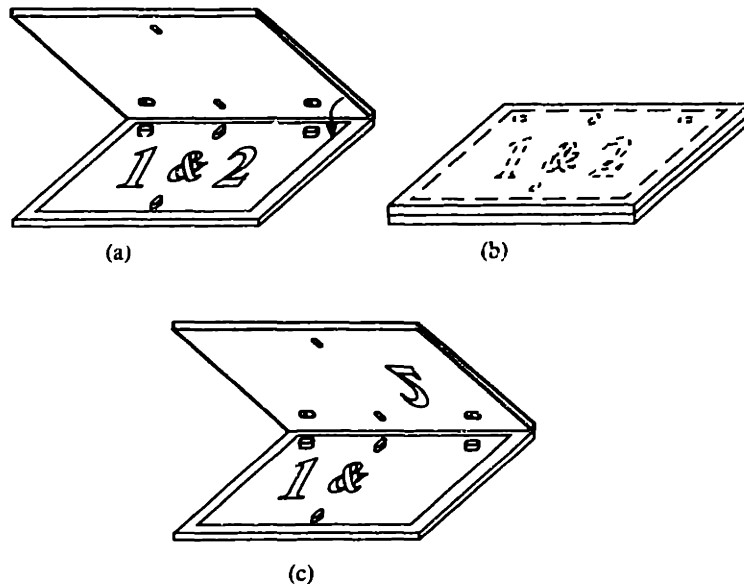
Fixturing a film set to the glass of an exposure frame.
